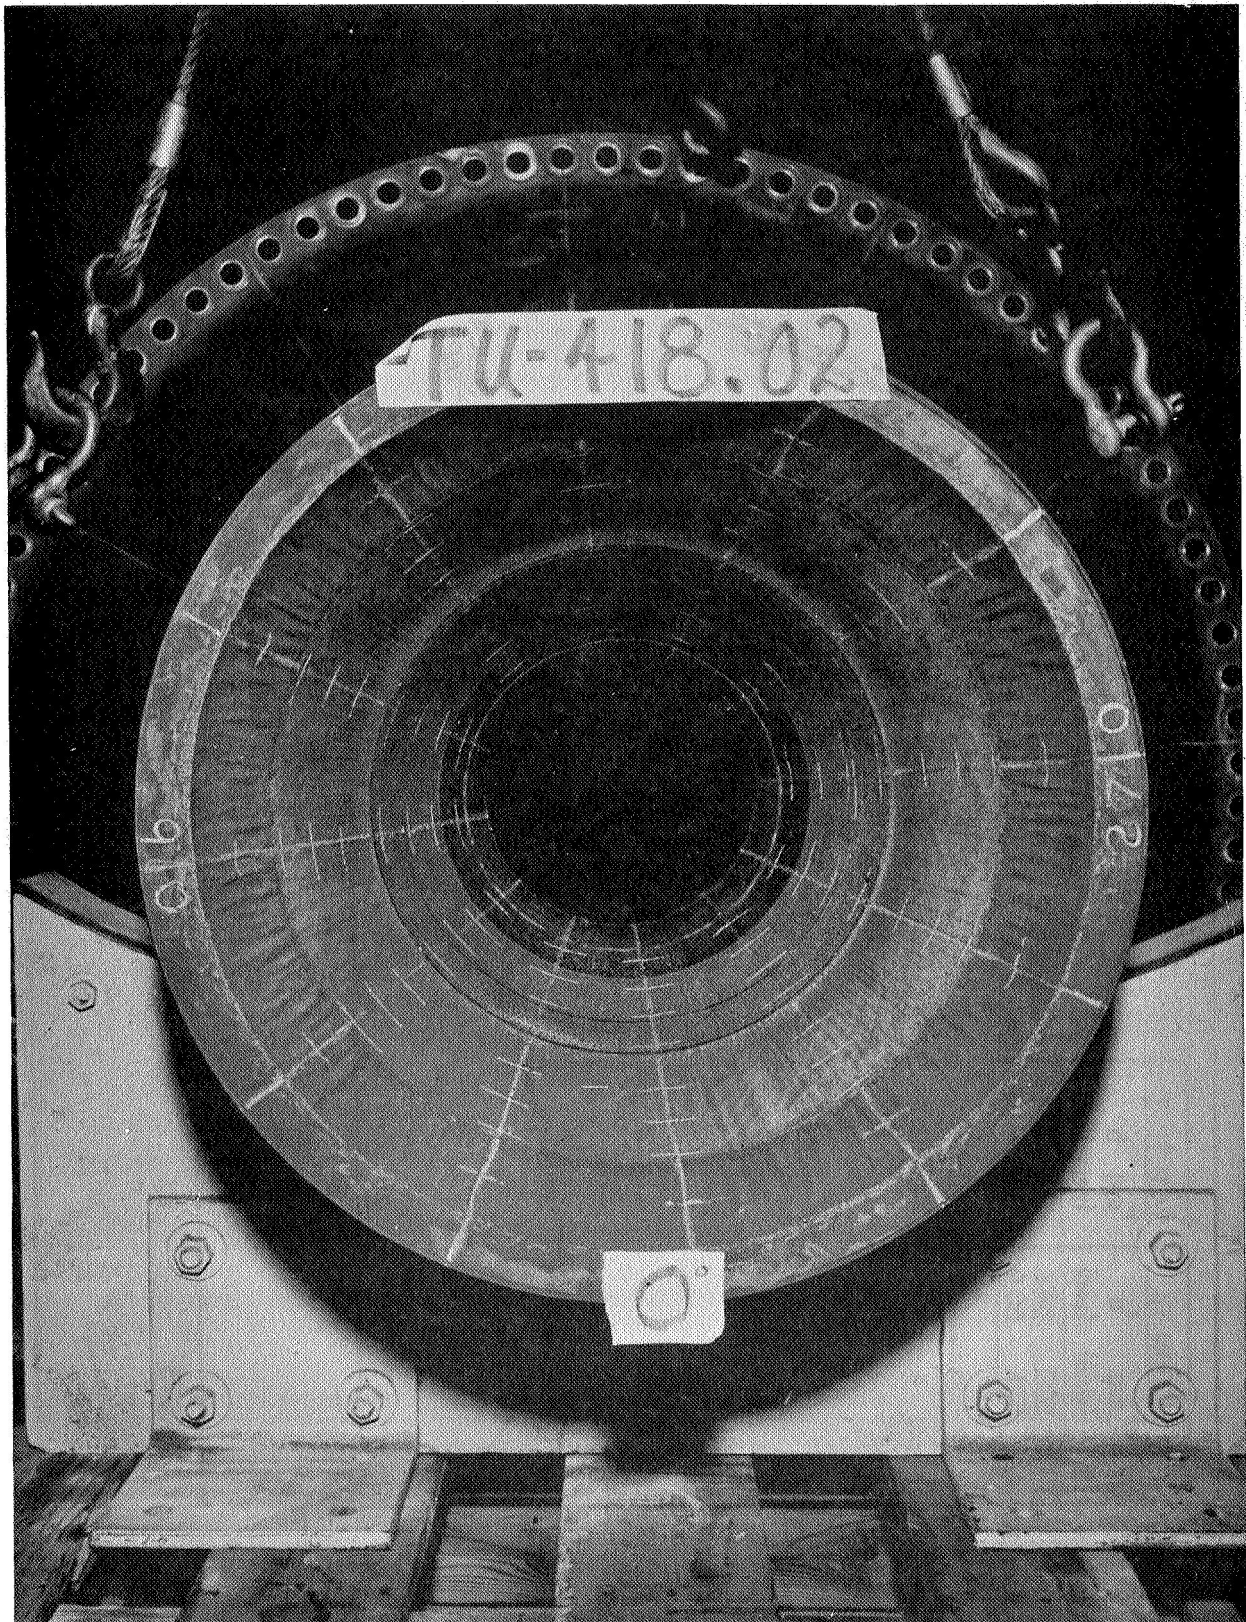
Nozzle Exit Cone after Static Test of 65-SS-3 Motor
